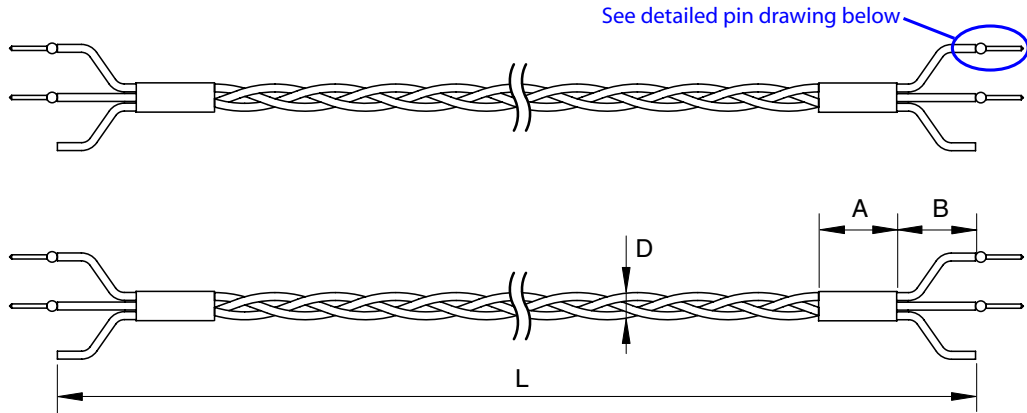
Outline drawing and dimensions for DC-DIYsig2x50 and DC-DIYsig2x100, 2-way DIY signal wire. See table below for dimensions.
